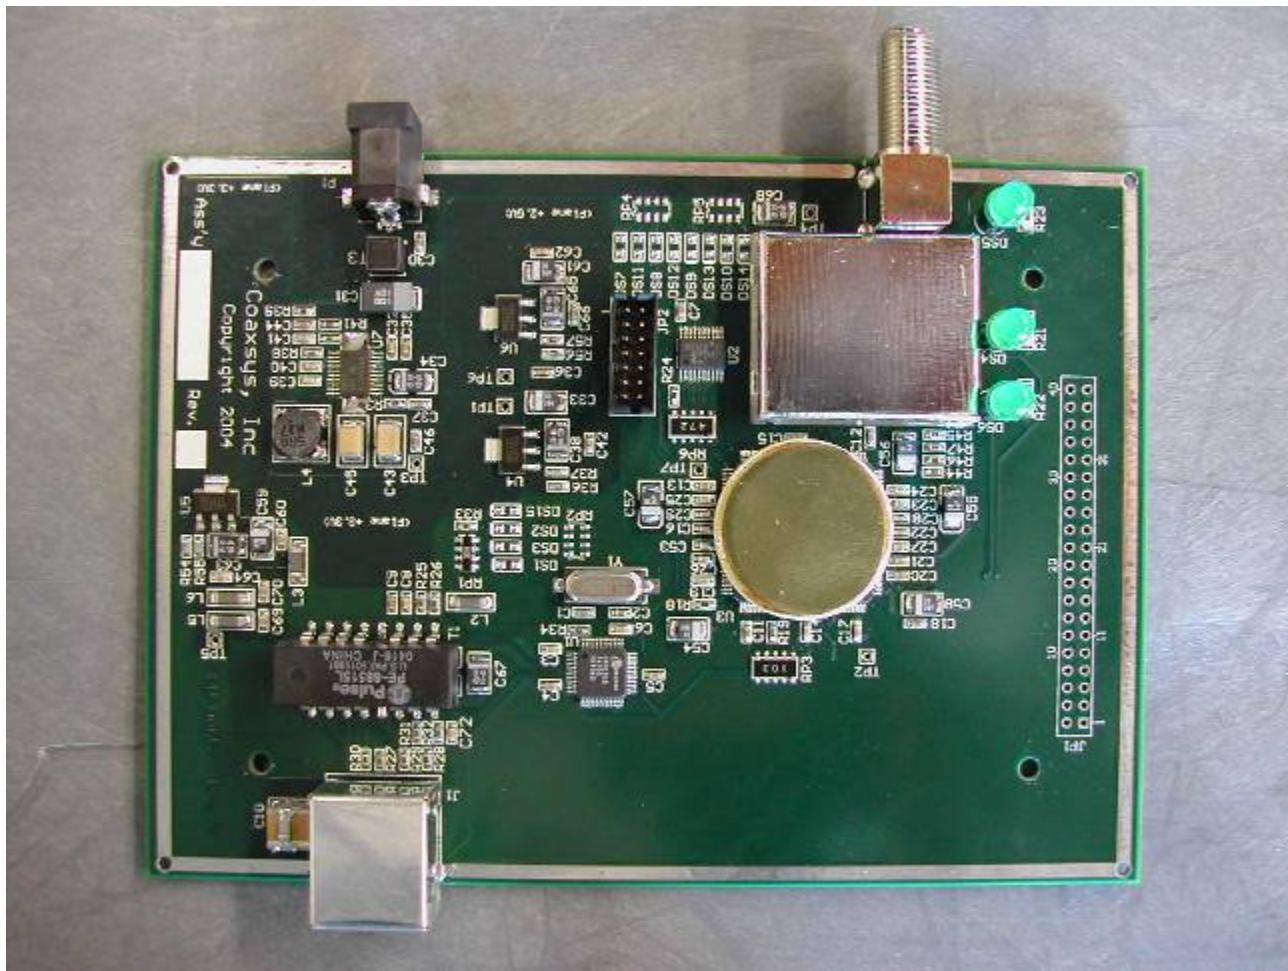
PLI Photograph Number 5406C3334SJ-14 illustrates the top view of the EUT with the bottom cover removed showing the circuit side of the EUT printed circuit assembly, number PN-00057 Rev. 3. *[Short term confidentiality requested for this photo in FCC submission]
